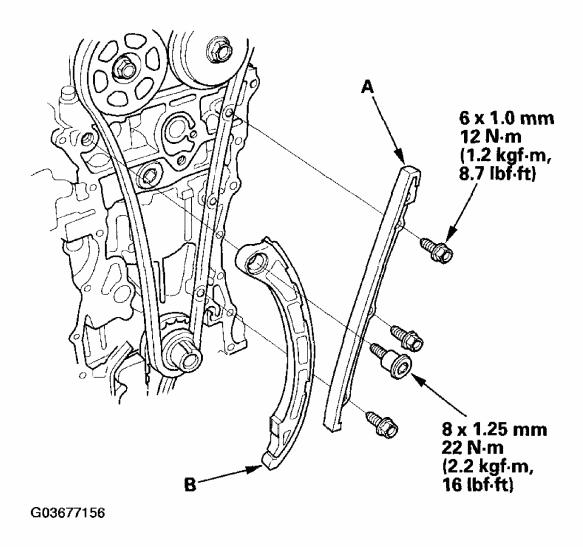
Installing Cam Chain Guide A And Tensioner Arm With Specified Torques
